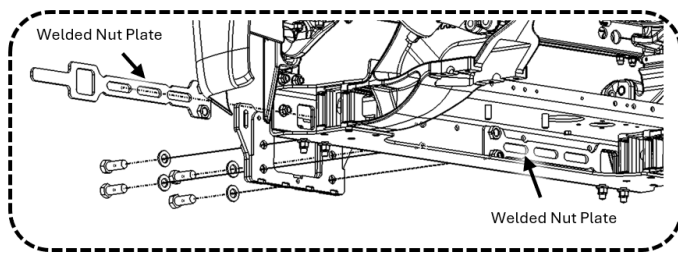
Welded Nut Plate Installation – Rear View
